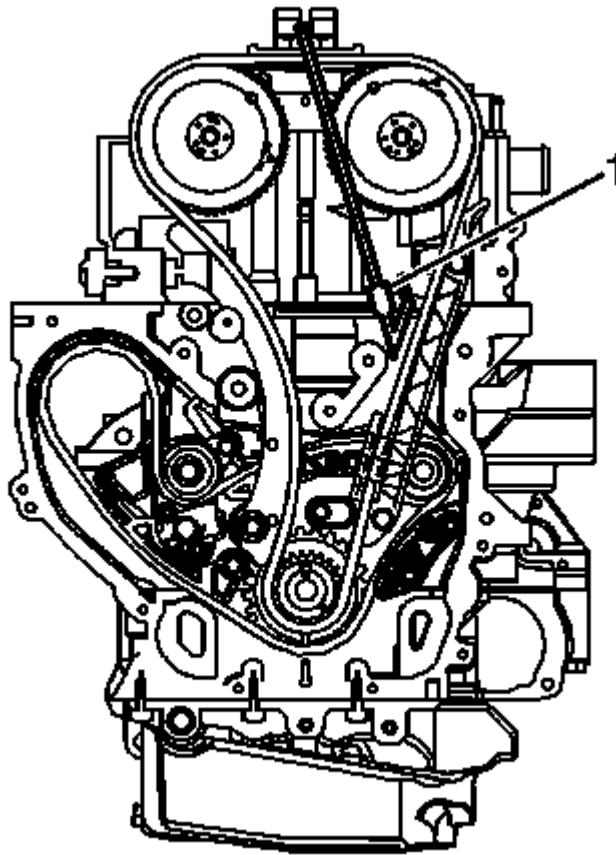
View Of Upper Timing Chain Guide Bolts And Guide
